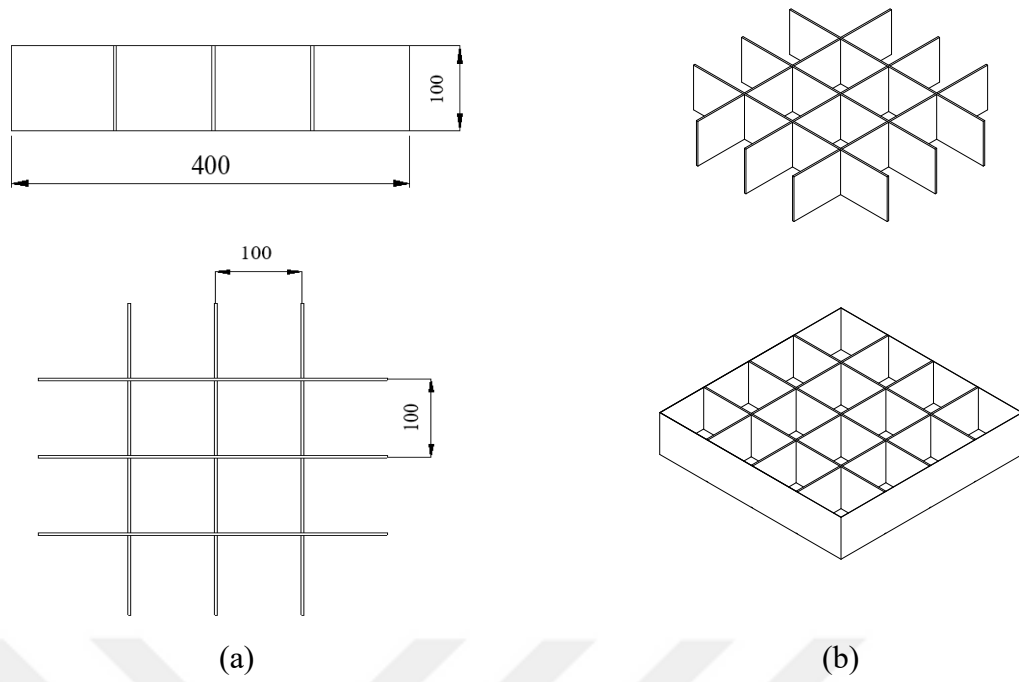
Collection tray compartments. (a) Front and top views; (b) Isometric view
